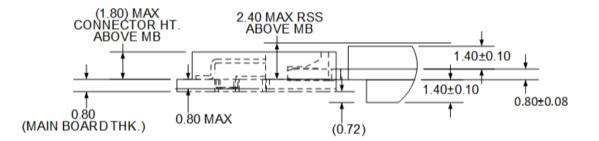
Stack-up Mid-mount (In-line) Double-sided (D5) Module for 1.5 Maximum Top-side and Bottom-side Component Height
